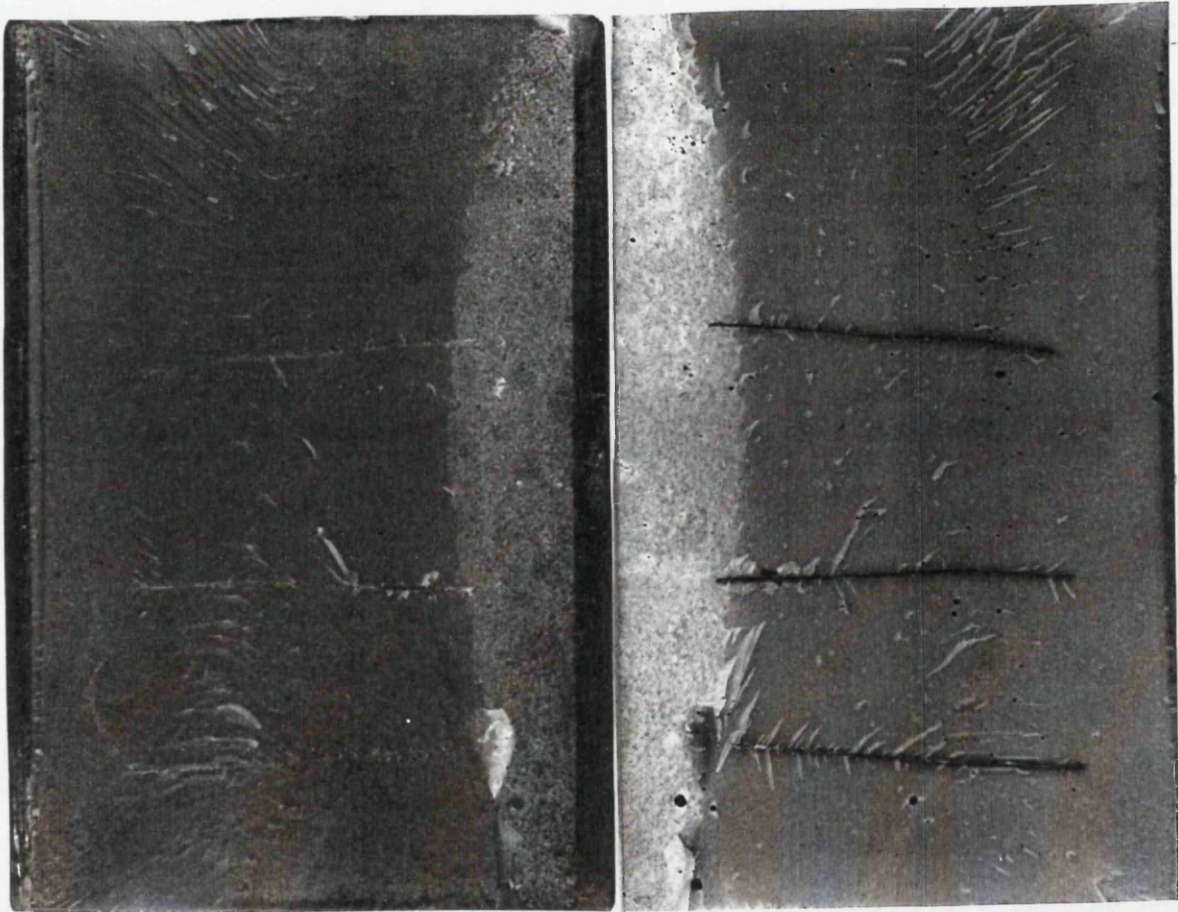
FRACTURED SURFACES OF TENSILE CLEAVAGE SPECIMEN (STEEL/GRP)
